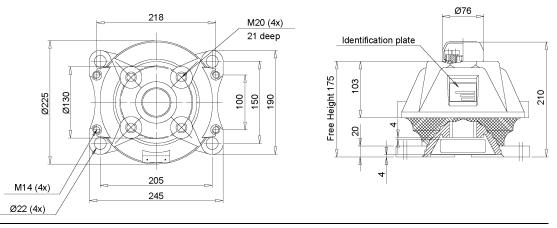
Rubber mount, In-line engines (DAAE004230C)
